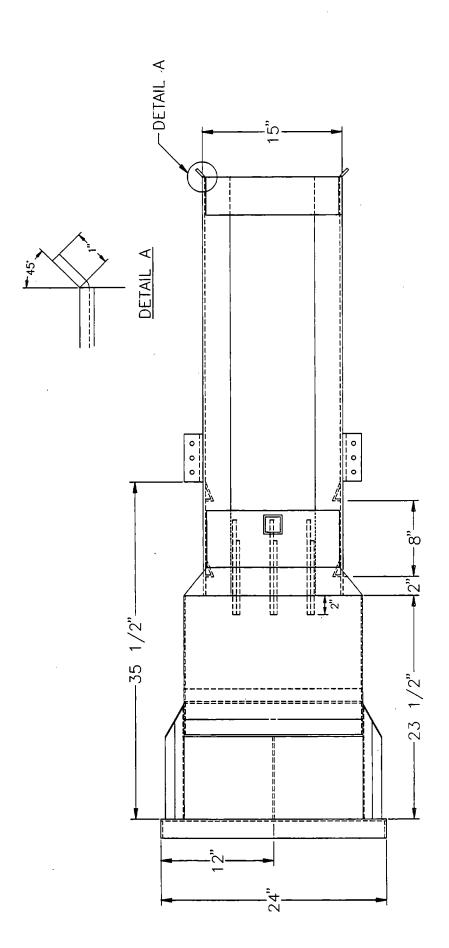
Side View of the BEST Impact Head for Tests BEST-2,3, and 4.
